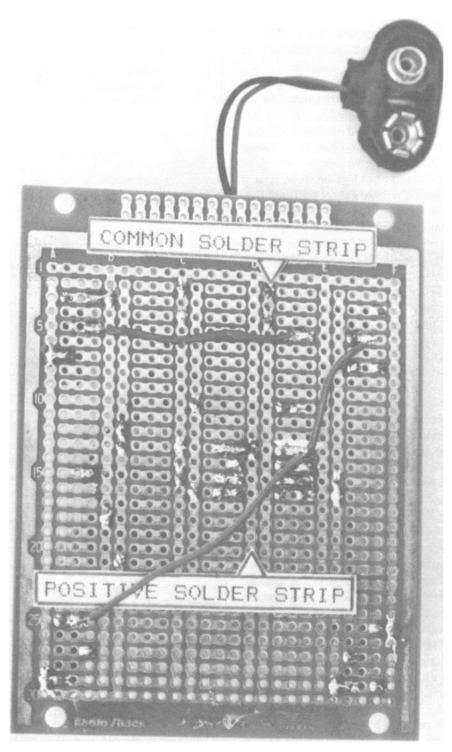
This is the bottom-view of the universal op-amp circuit board.
